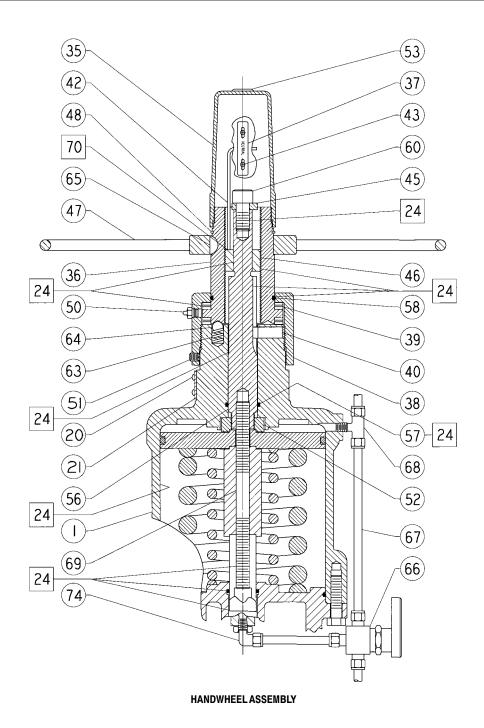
Fisher 585C Size 25 and 50 Actuators Handwheel Assembly (spring retracts actuator rod)
